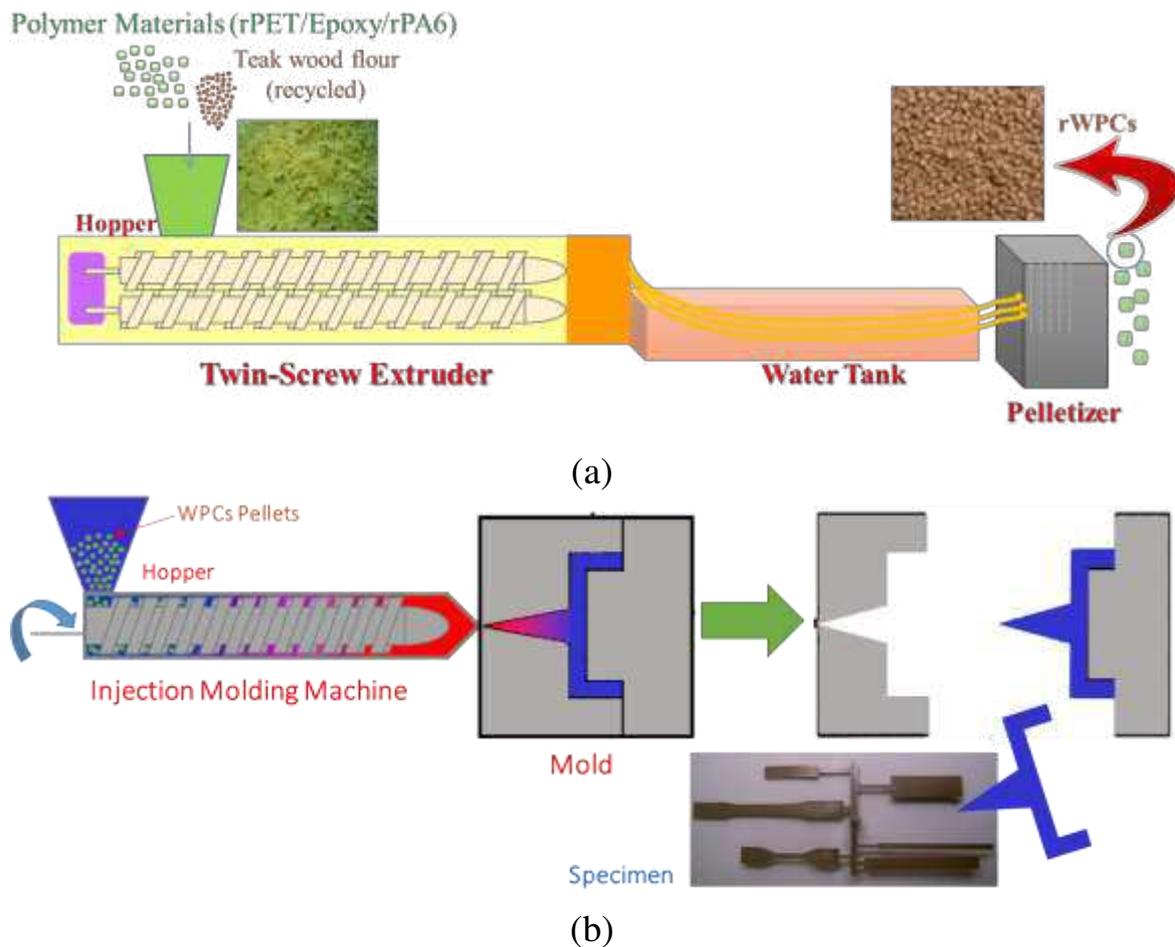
rWPC preparation: (a) compounding process for fabricating the rWPC pellets; (b) injection molding for fabricating the rWPC specimens
